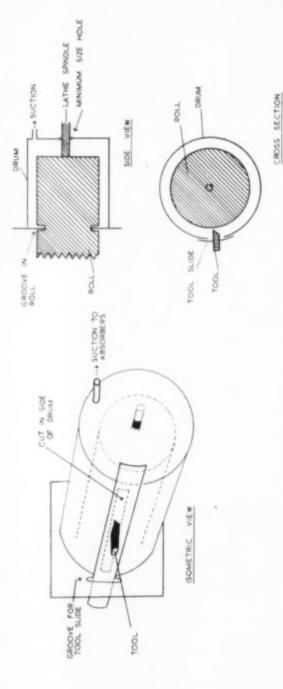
Apparatus for collecting most of gas evolved during machining.
